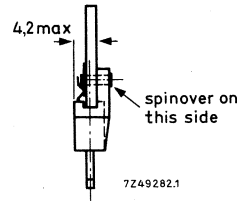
Fixing of the interconnector to the printed-wiring board.
